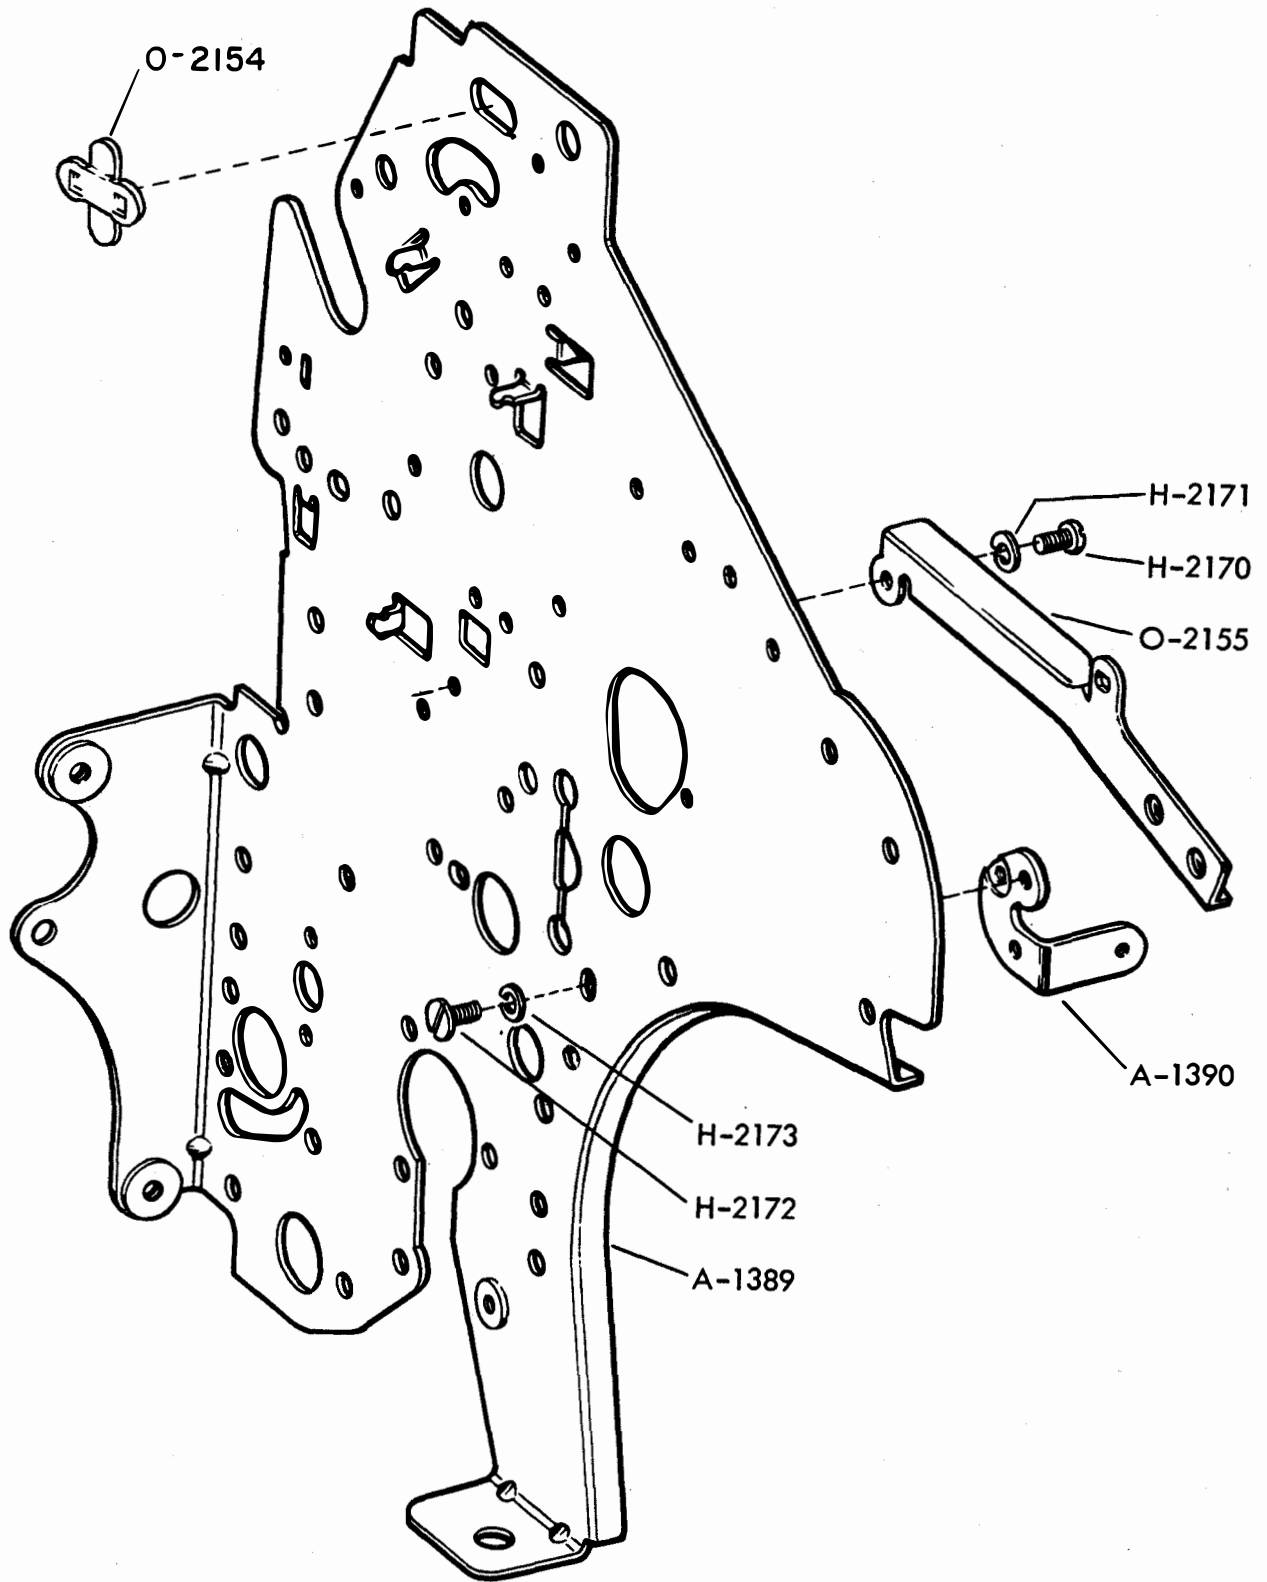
Automatic Typewriter, Right Side Frame Mechanism
